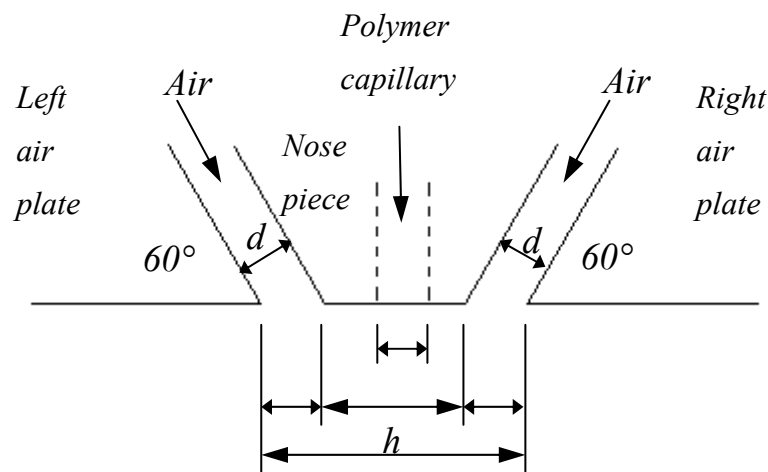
A cross-sectional view of the 60° blunt air die [32].
